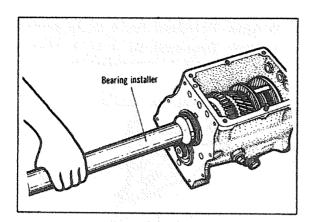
Assembling of Main Drive Gear and Mainshaft (2)
